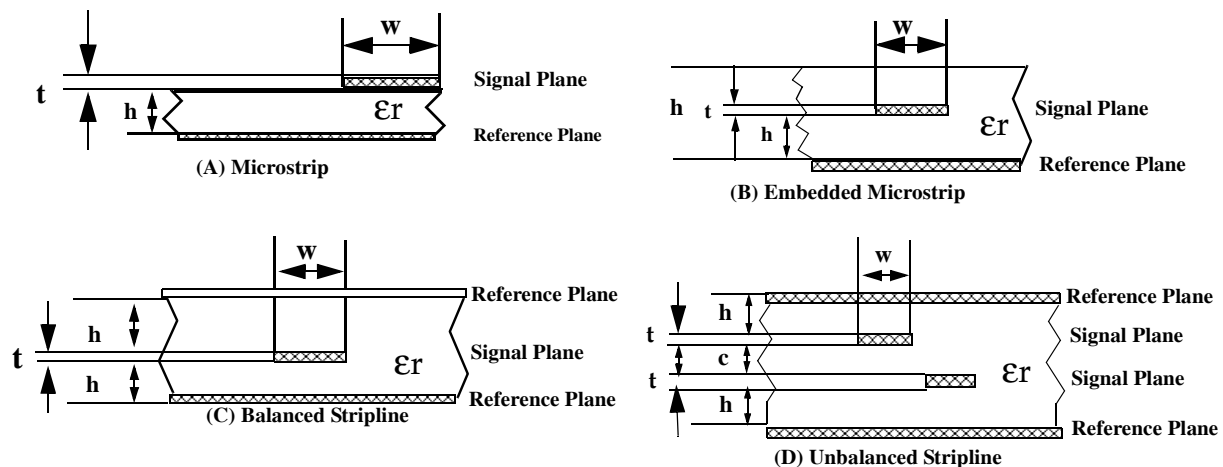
Transmission Line Printed Board Constructions: w , t , and h
